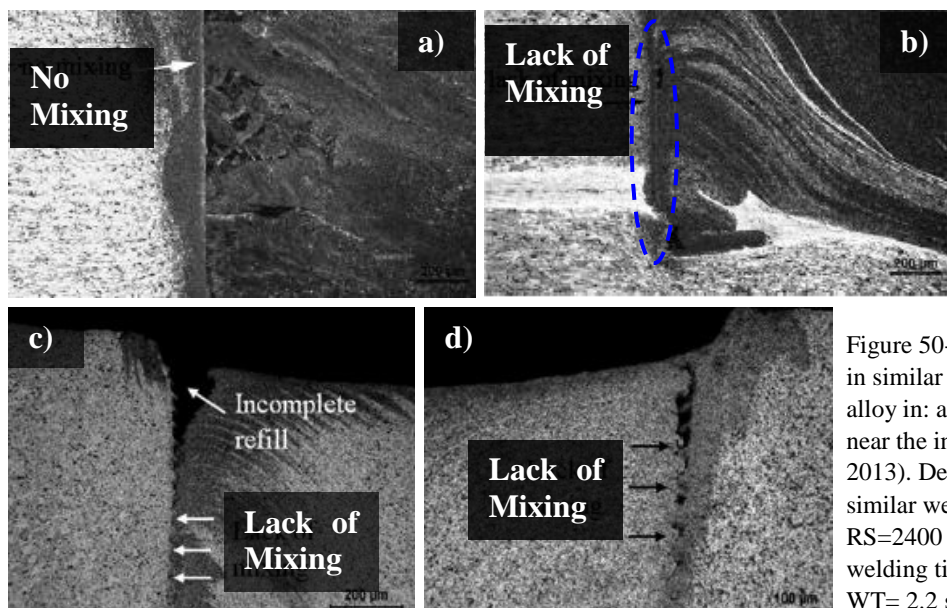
Detail of lack of mixing in similar welding of 7075-T6 Al alloy in: a) the upper sheet and b) near the interface (Shen et al. 2013). Defects found in 6181-T4 similar welds, produced with RS=2400 rpm and short total welding times: c) WT=2 s and d) WT= 2.2 s (Rosendo et al. 2015)
